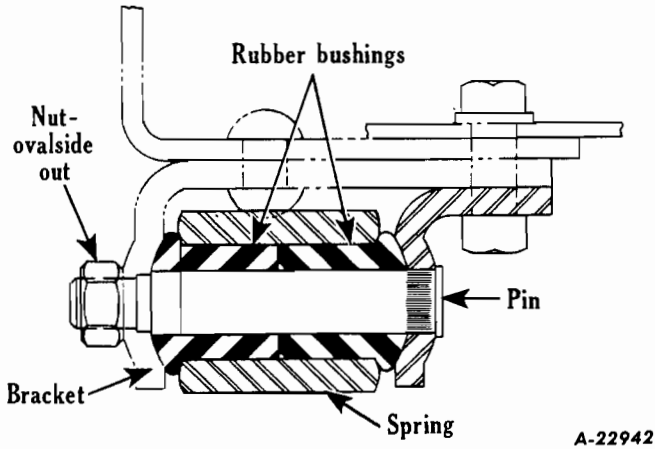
Front Spring Front Bracket For Models L-130, LB-140, LM-150.
